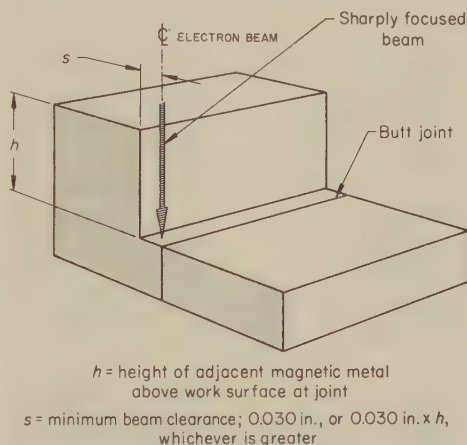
Joint location and beam clearance for a butt joint near a projecting corner, T or shoulder in a magnetic work metal. For electron beam welding of a straight-line joint of cross section as shown, or a circular or circumferential joint.
